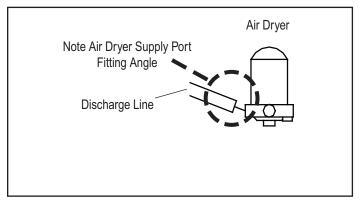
INSPECTING AIR DRYER SUPPLY PORT FITTING
